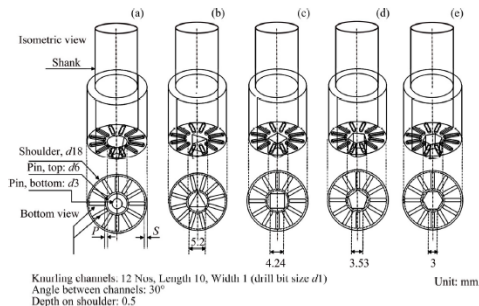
Tools used in FSW process showing knurling shoulder feature [11].
